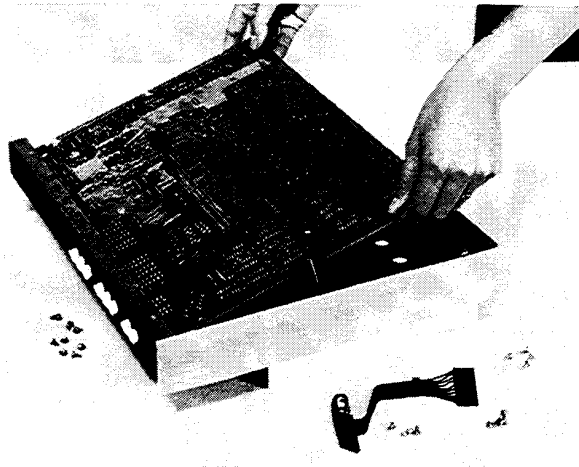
Removal of the C board. The ribbon cable must be disconnected first. Prior removal of the display board also is highly recommended.
